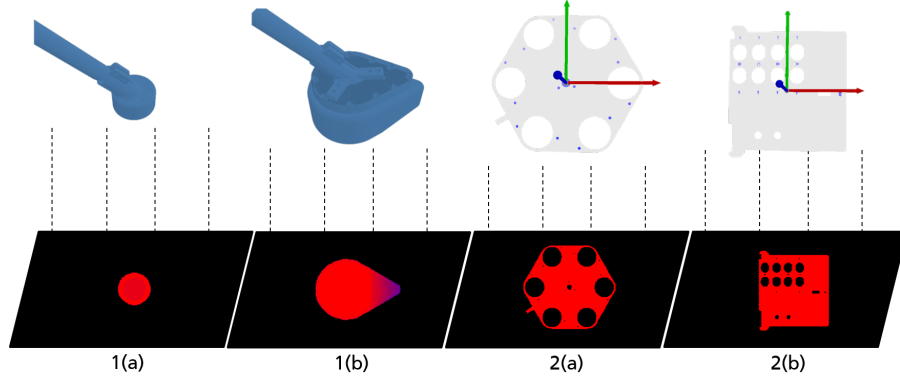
Gripper and workpiece projections on 2D images. 1(a) Projection of a small gripper. 1(b) Projection of a large gripper. 2(a) Projection of a hexagonal type workpiece. 2(b) Projection of a rectangular workpiece.
